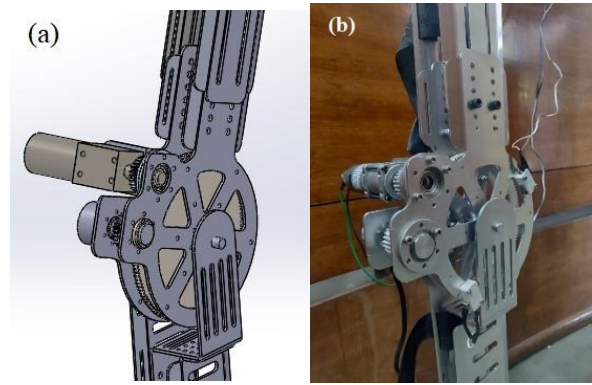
(a) CAD model of gearbox for knee joint (b) Actual gearbox for knee joint
